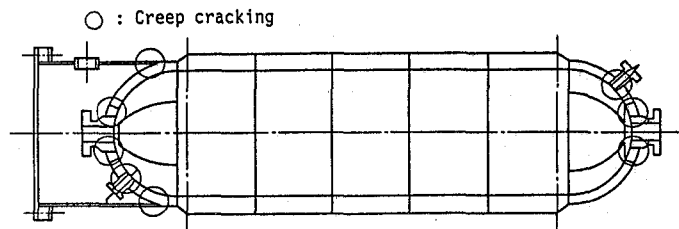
Examples of location where creep cracking are detected in the welds of pressure vessel
